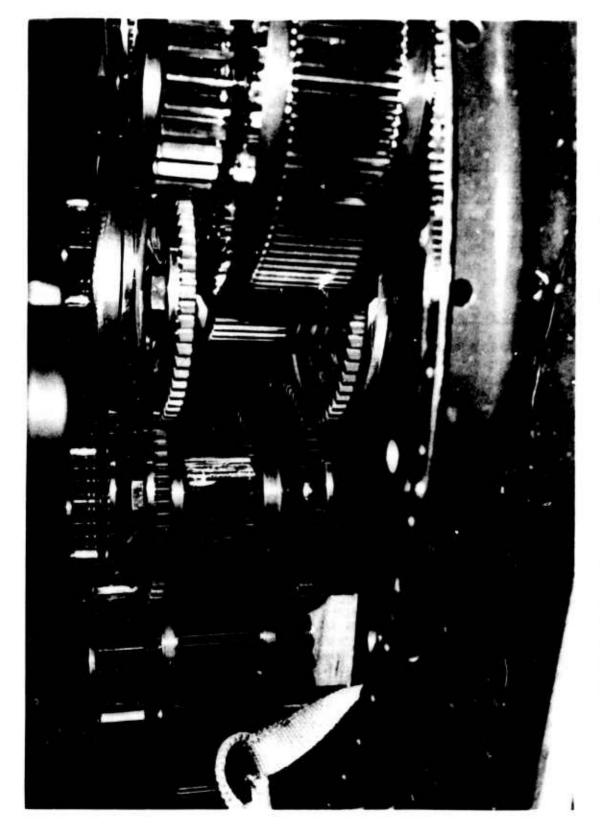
First-Row Pinion Damage - Roller Gear Unit.
